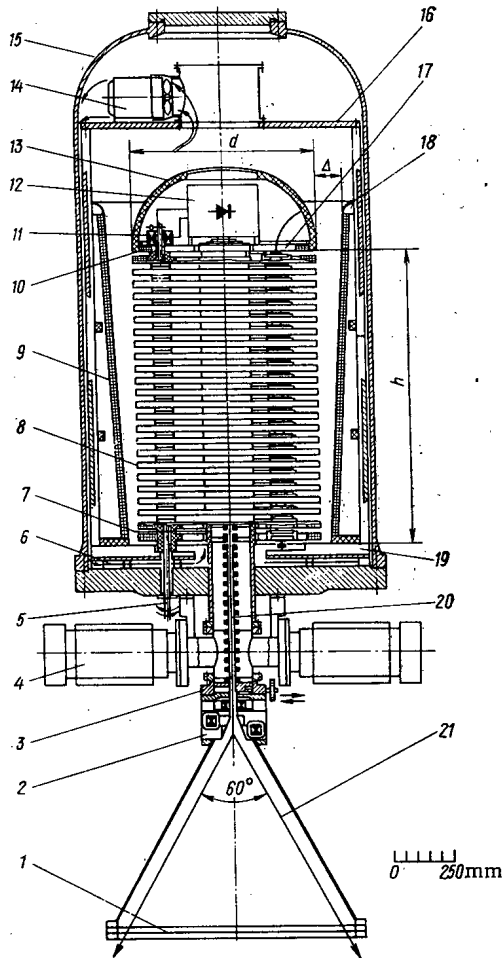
Accelerator construction: 1) exit window foil; 2) deflection system; 3) slide valve; 4) vacuum pumps; 5) control shaft; 6) cooler; 7) accelerating tube; 8) rectifier section; 9) primary winding; 10) top coil; 11) variable transformer; 12) injector control unit; 13) high-voltage electrode; 14) fan; 15) boiler; 16) shield; 17) high-voltage electrode base; 18) magnetic circuit; 19) disk-shaped magnetic circuit; 20) electric conductor; 21) electron beam boundary.
